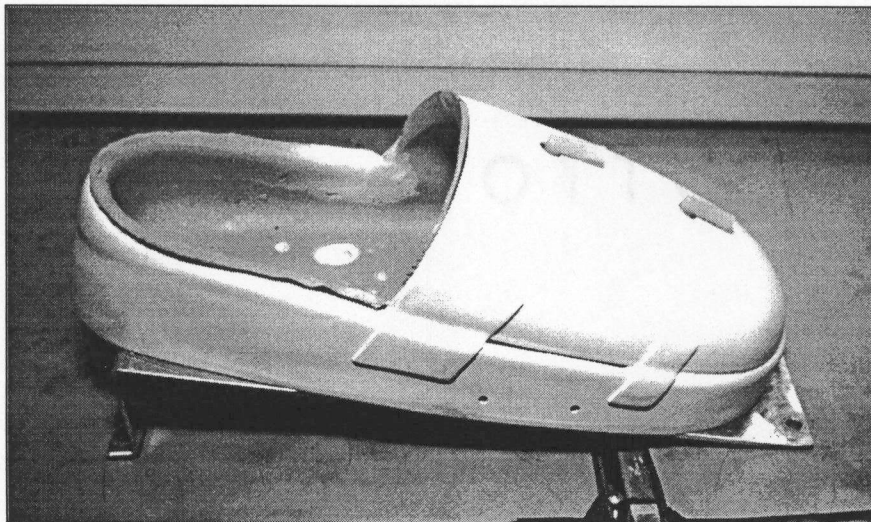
Vacuum-formed base with toepiece, with bladder and rubber insert in place
